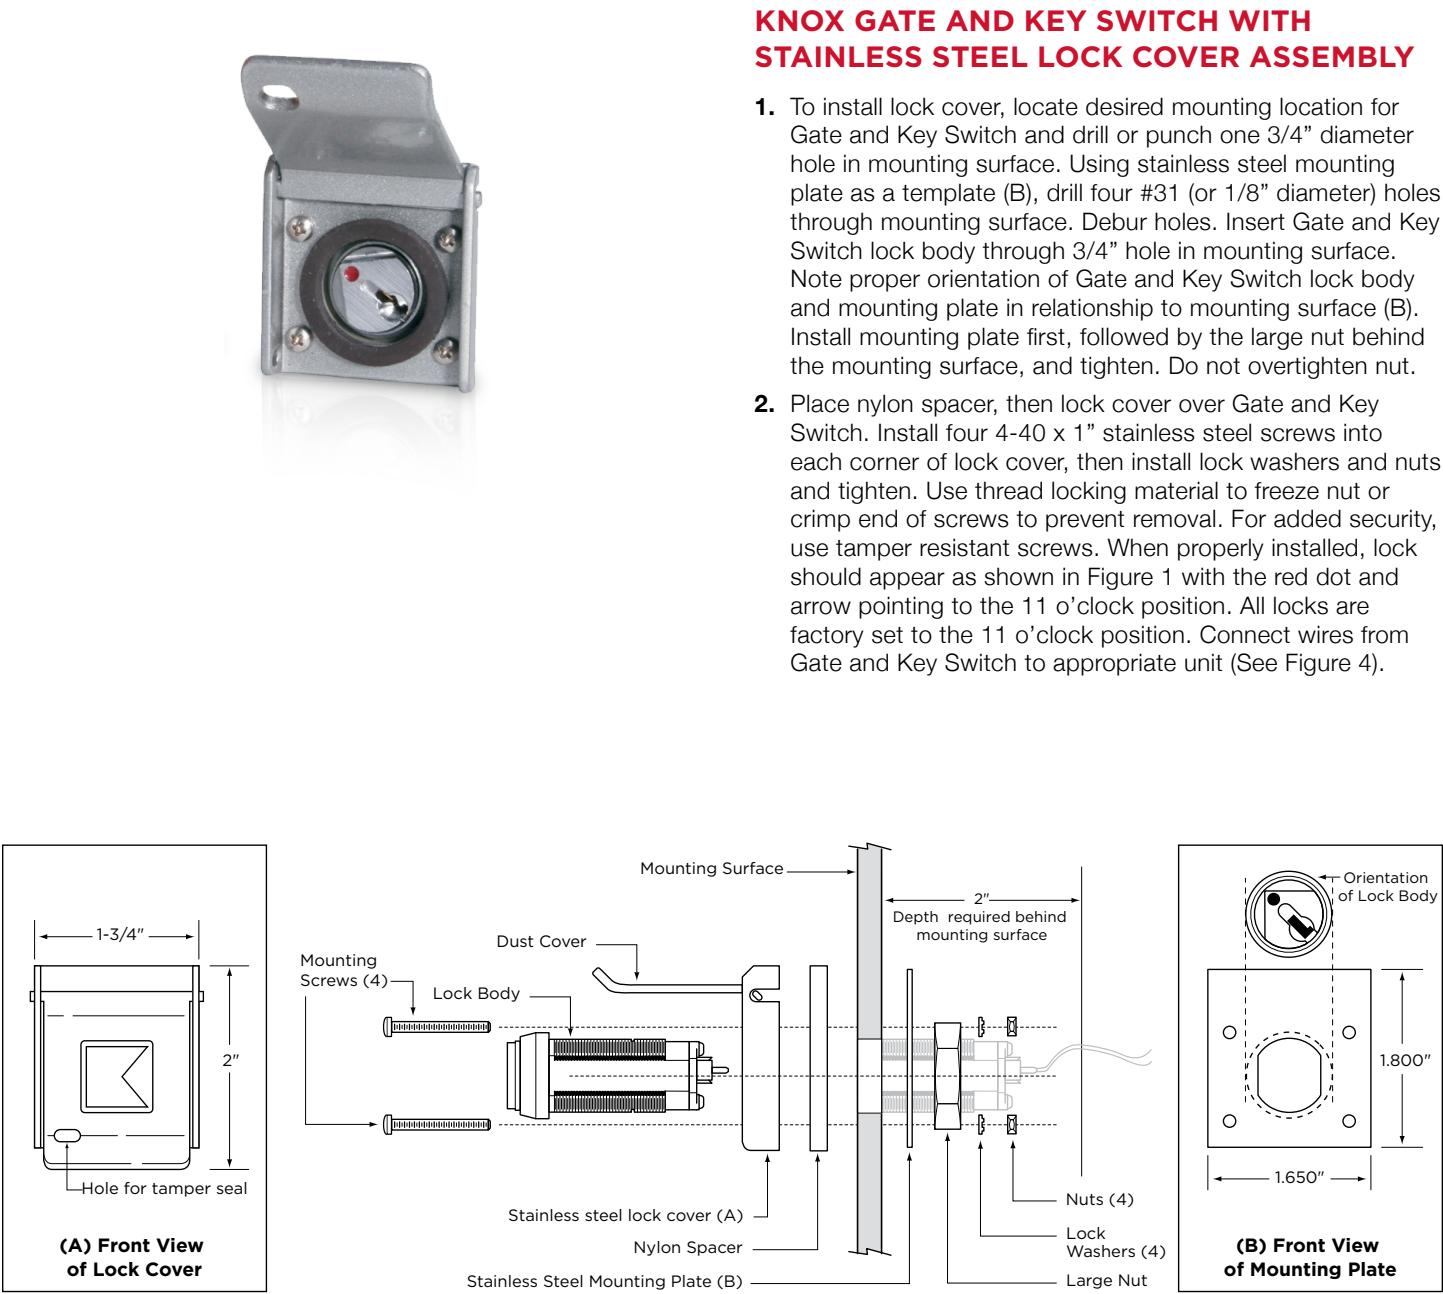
Key Switch with Stainless Steel Lock Cover Assembly
